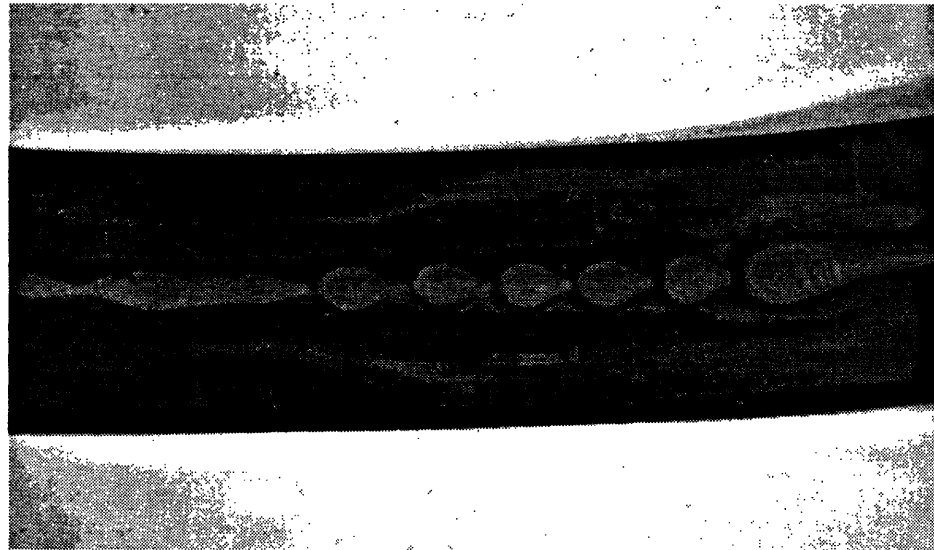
Bead Deposited on Workpiece of Cross Section Dimensions .8mm x 5.08 cm
